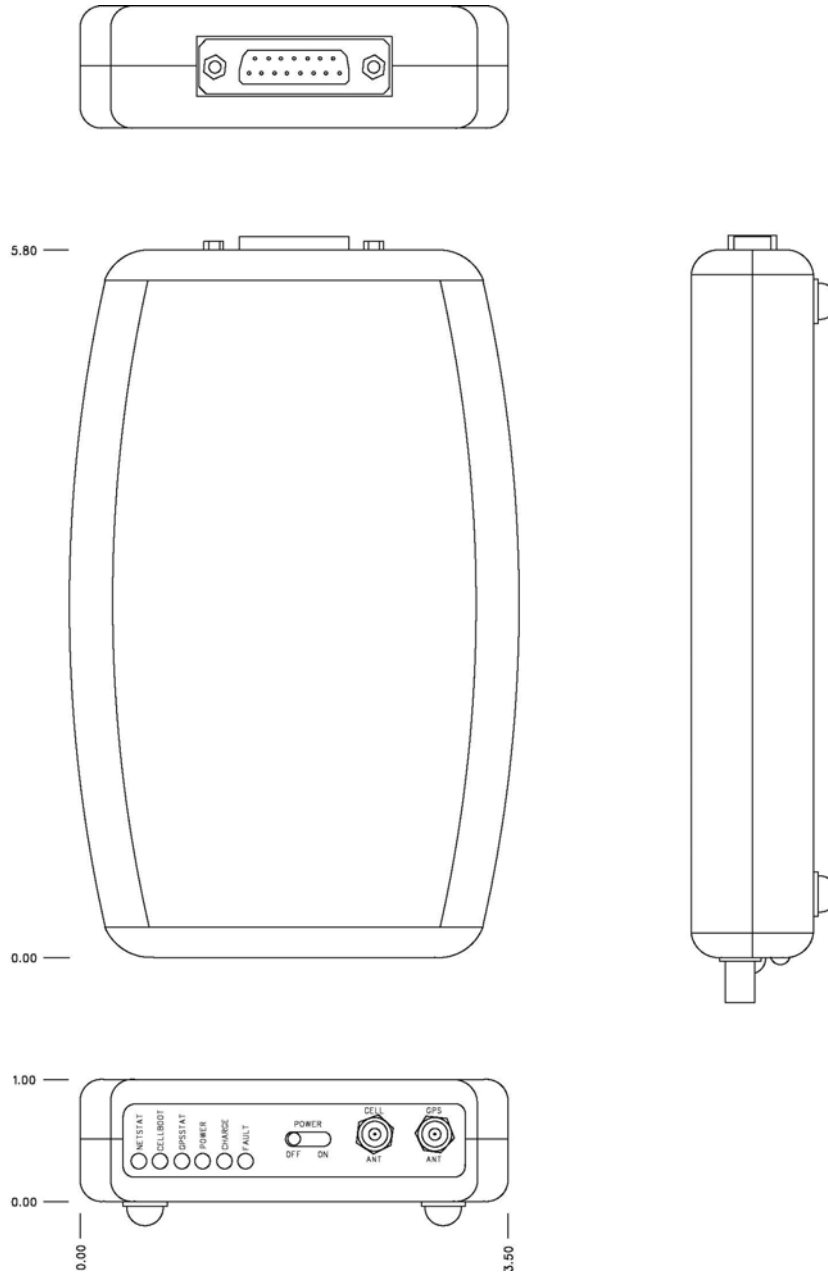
BS2300 Mechanical Outline (Dimensions In Inches)
